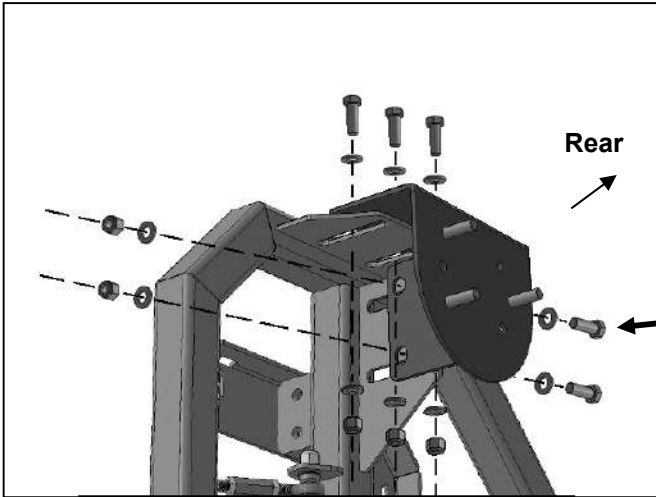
Attach Adjuster Assembly to Spacers in tabs on Swing Arm
